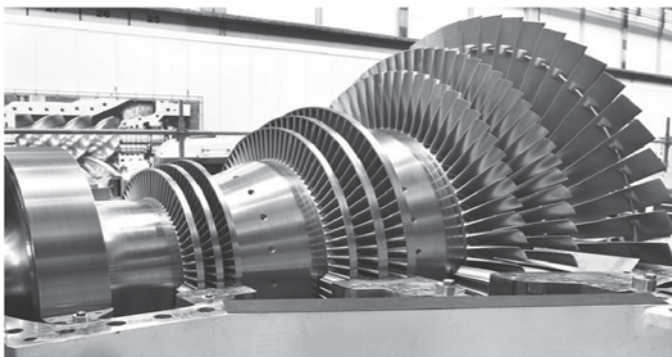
Industrial steam turbine of reaction type; equilibrium piston on the *left-hand side*. (Courtesy MAN Diesel & Turbo)
